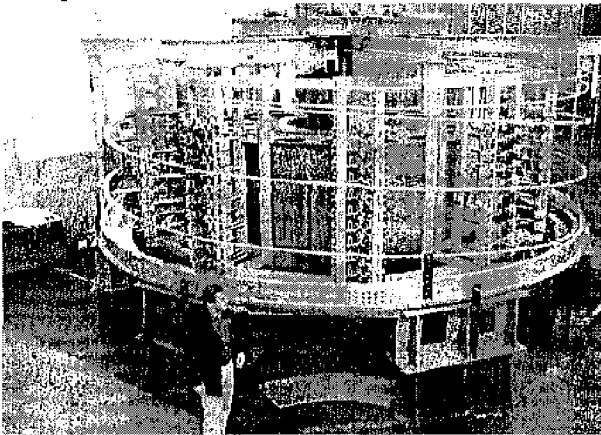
View of the transferring tooling system used for the winding pre-industrialization.
